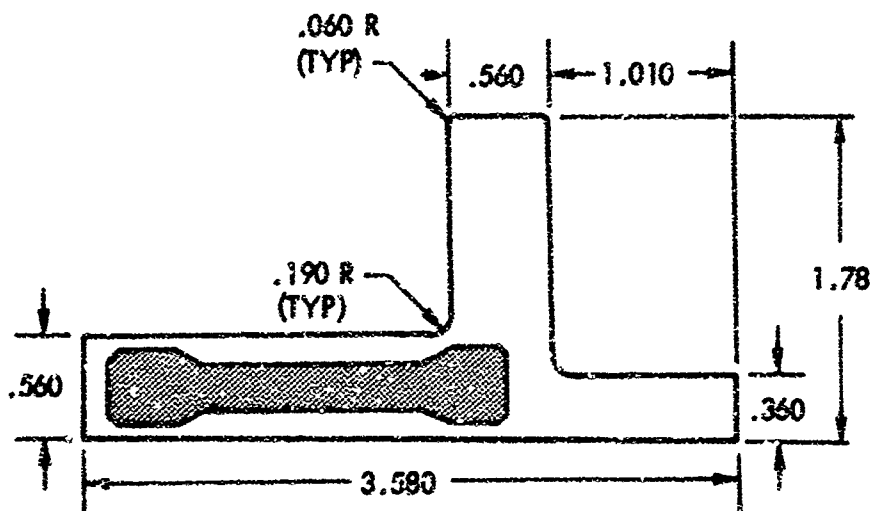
Typical Cross Section Locations Longitudinal Specimens
